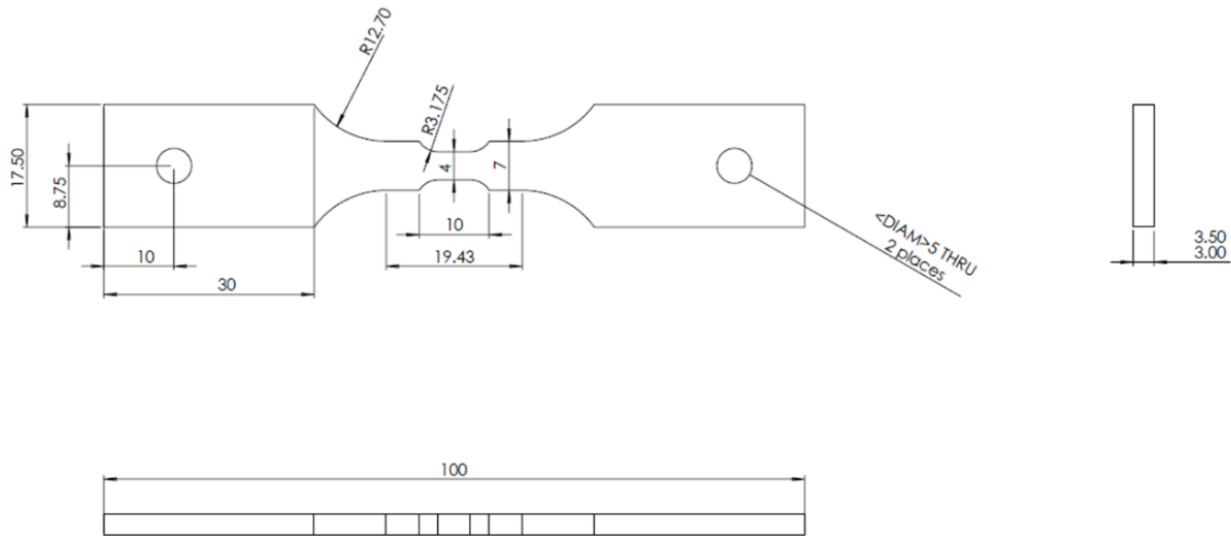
Specimen dimensions for Gleeble-based mechanical testing of HSLA-100 steel for a double-reduced gauge section (dimensions in mm).
